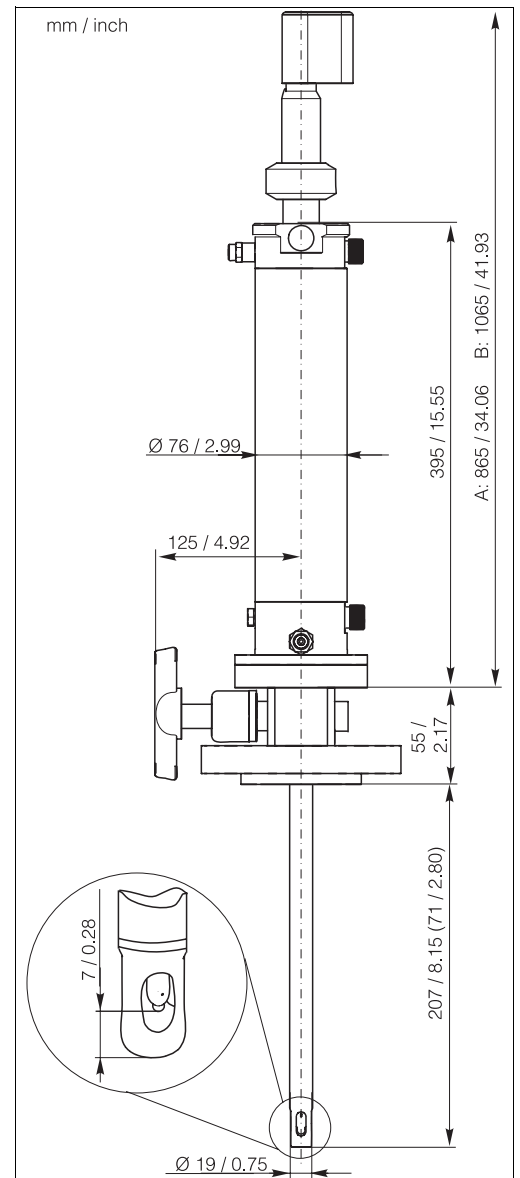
Assembly version: manual, long, for gel sensors, flange
